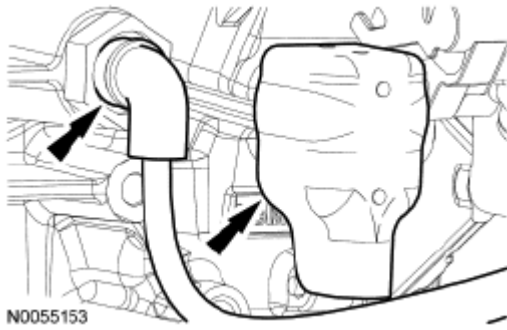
Locating Block Heater Electrical Connector & Heat Shield
